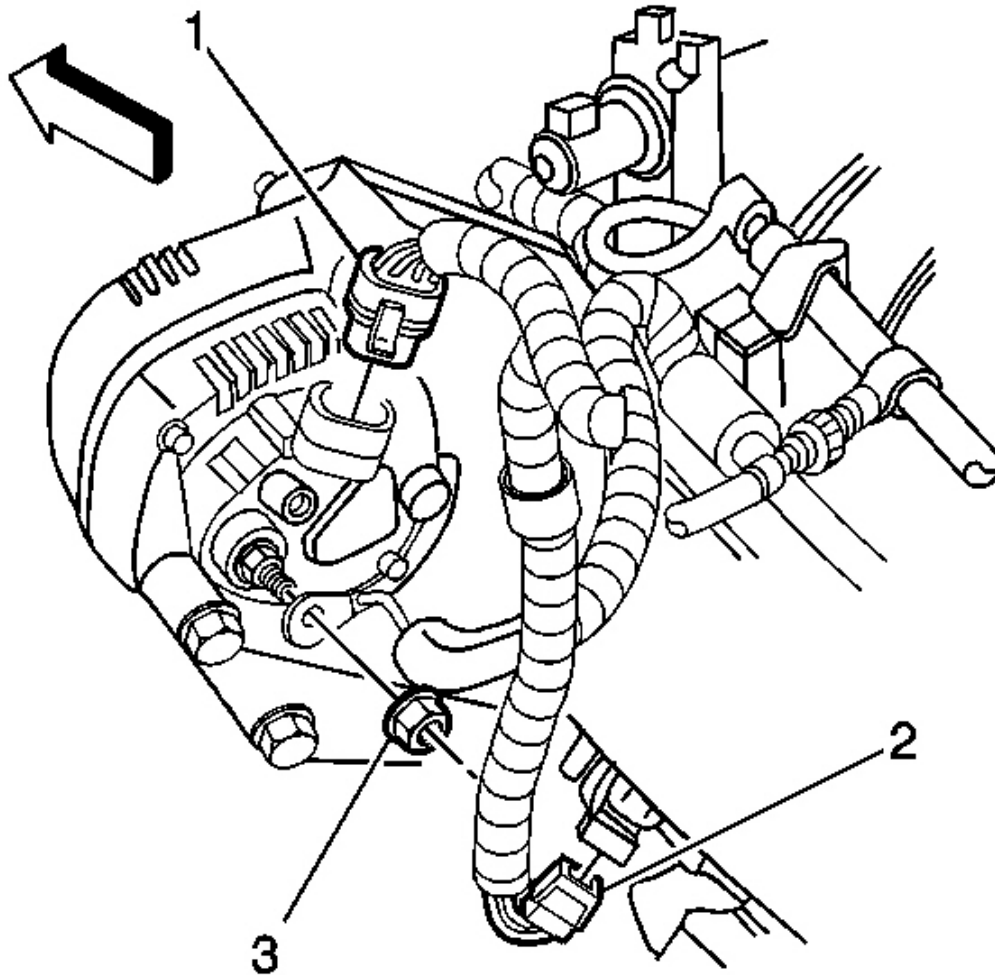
Engine Wiring Harness Generator Lead Nut & Generator Electrical Connector
